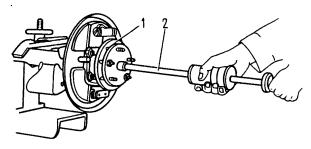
Pressing Out Axle-Shaft: 1 - axle-shaft; 2 - impact remover tool 67.7823.9516
